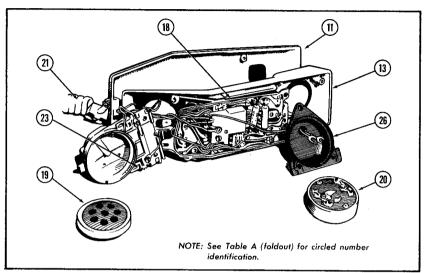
Parts of Handset Assembly NE-H2Q Type
